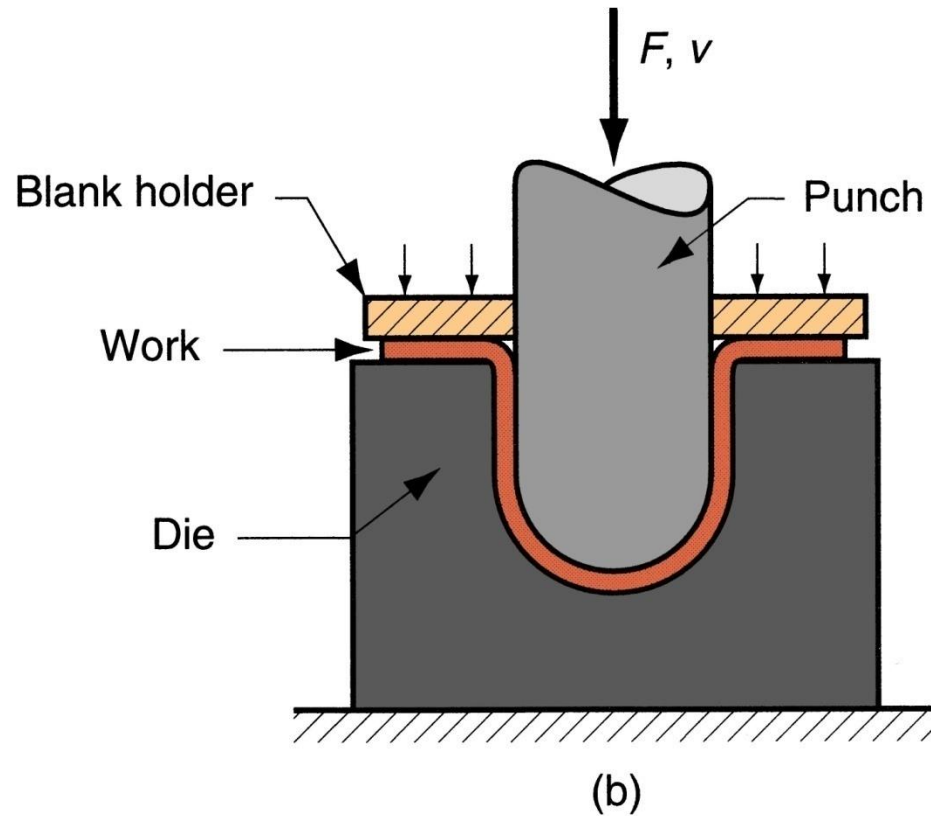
Basic sheet metalworking operations: (b) drawing
